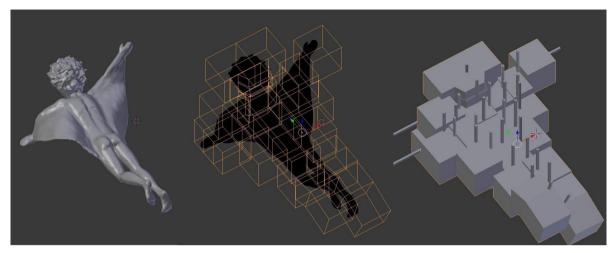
Cutting the statue with boxes and Fig 7.3 assembling printed pieces
